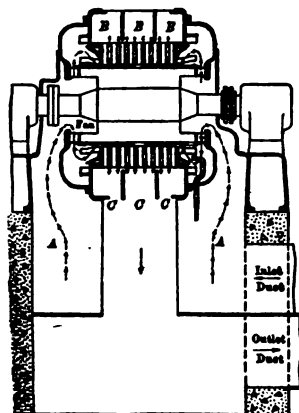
Radial system of ventilating a horizontal-shaft high-speed generator.
